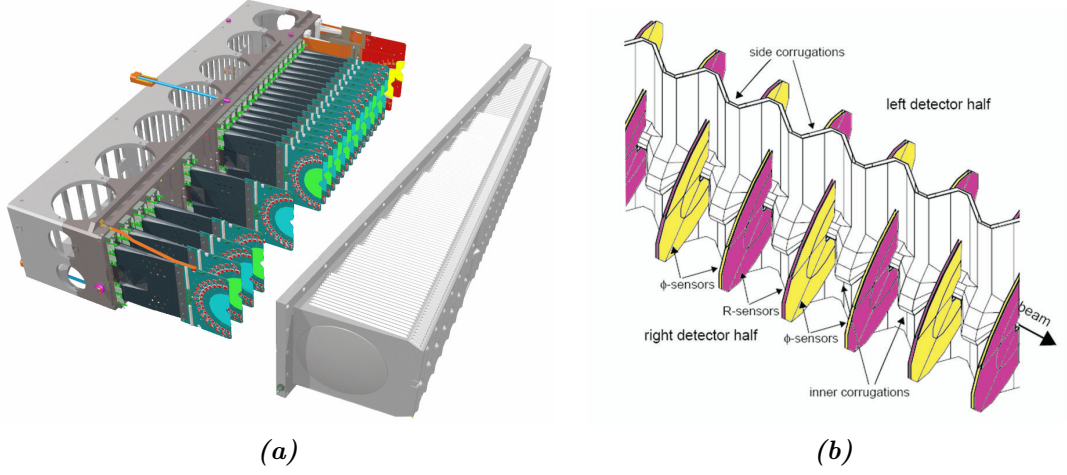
(a) Exploded view of the module support and modules (left) and the RF box (right), (b) Zoom view of the inside of an RF-Foil with detector halves in fully closed position. [50]
